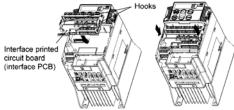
Mounting the Interface Printed Circuit Board (Interface PCB)
